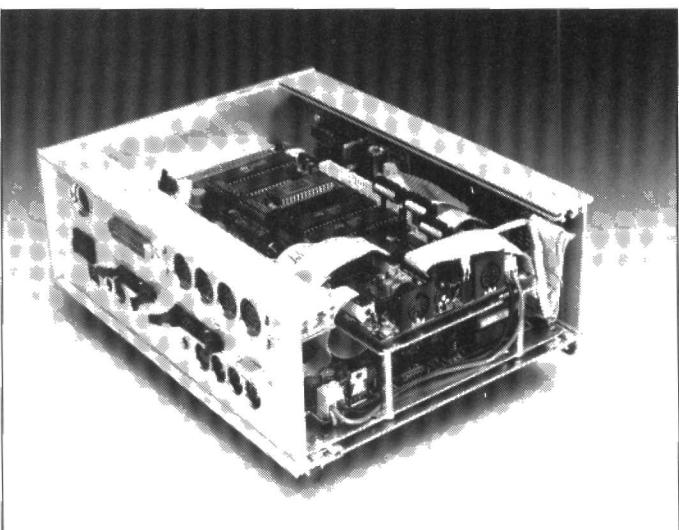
The Z80 card is the last module fitted before the side panel can be screwed on.
